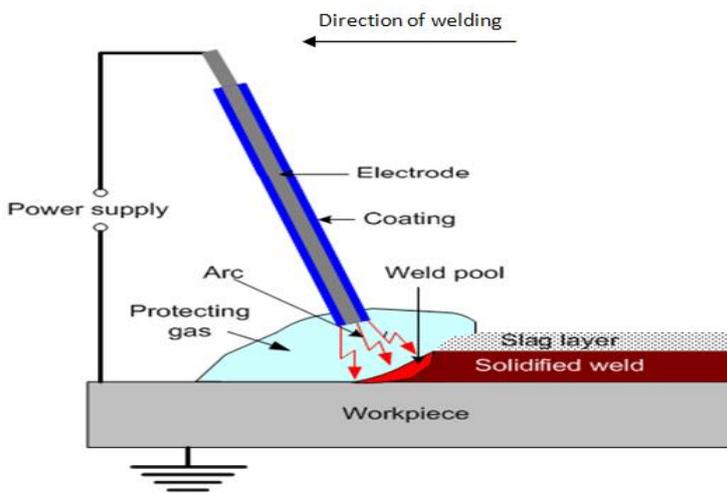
Schematic welding process of SMAW (Soy et al., 2011).
